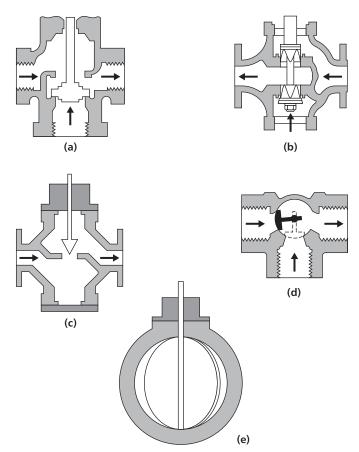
Common valve types: (a) plug and seat valve: three-port mixing valve, single seat; (b) plug and seat valve, three-port mixing valve, double seat; (c) two-part plug and seat valve; (d) rotary shoe valve; (e) butterfly valve
